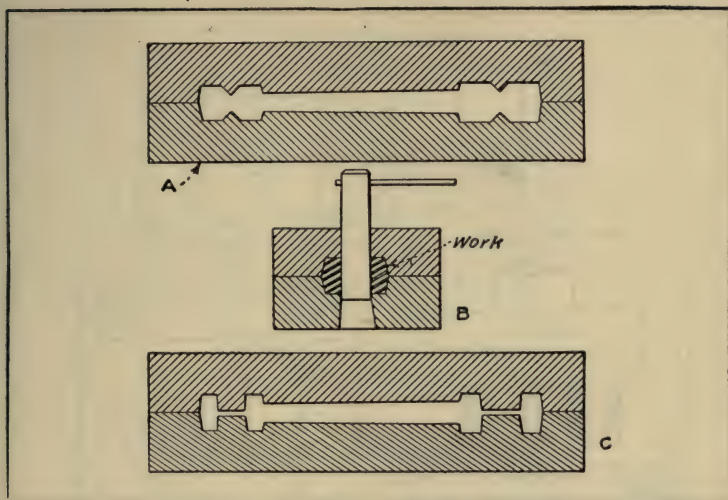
METHODS OF PROVIDING FOR HOLES IN DROP FORGINGS
